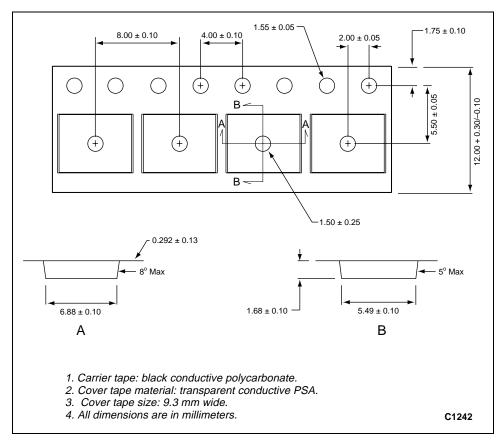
CX65002 8-Pin SOIC Tape and Reel Dimensions
